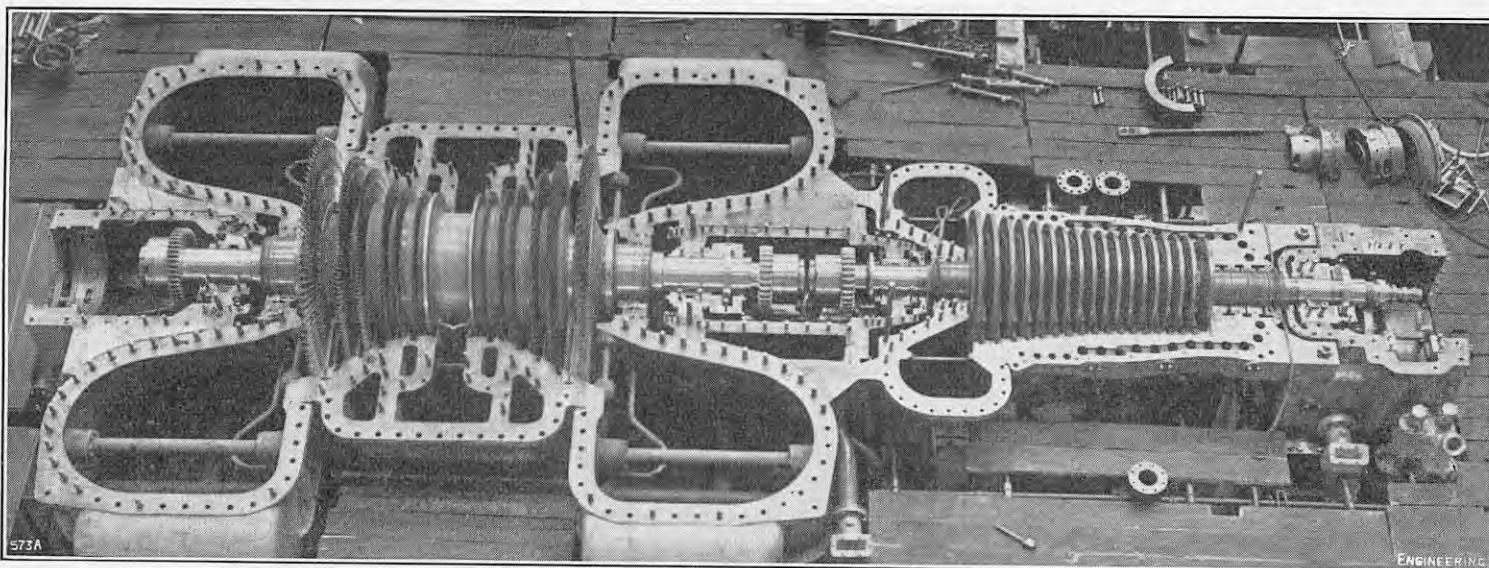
BOTTOM HALF OF 60-MW TURBINE.
